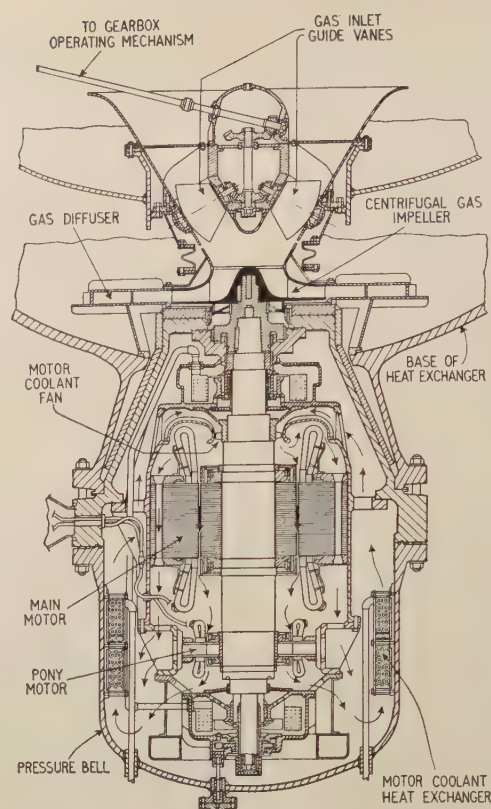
Cross-section through a gas-circulator which is driven by a 1,570 h.p. 3.3 kV induction motor. One of these circulators is enclosed in a pressure bell at the bottom end of each heat exchanger
